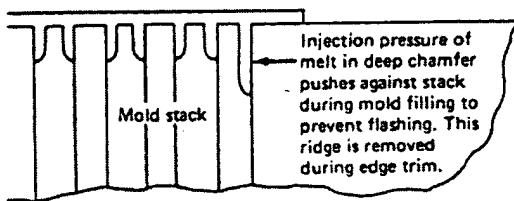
Built-in "melt piston" compresses mold cavity.
